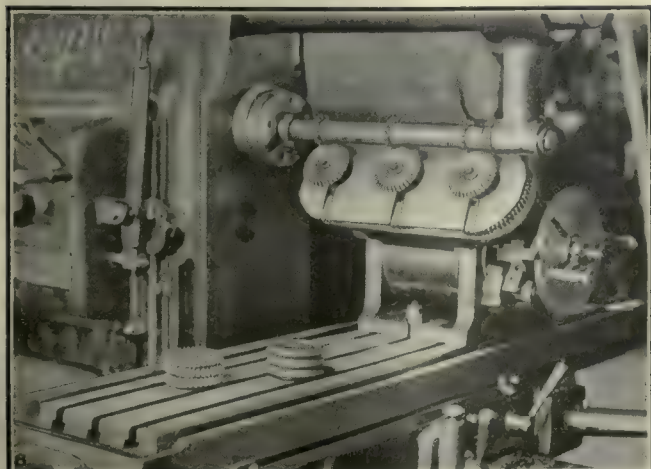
CUTTING BEVEL GEARS ON A MILLING MACHINE
